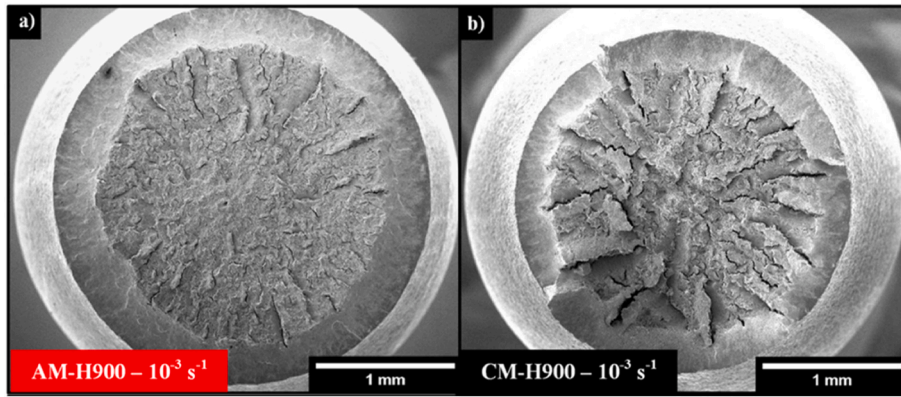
SEM images of fracture surfaces after tensile tests for a) AM-H900 and b) CM-H900 samples.
